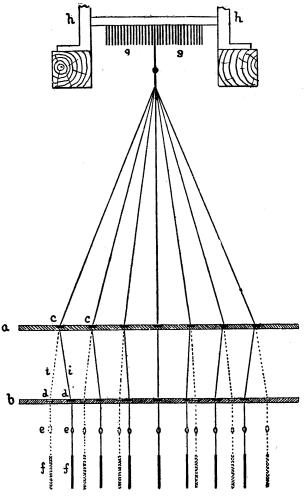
Now as to the plan of the harness, this perhaps will be best understood by making a plan of a cumber-board as
